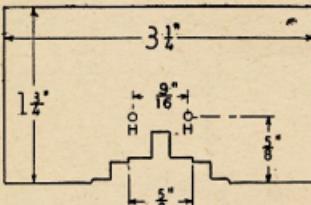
Shield for p.p. 6J6 stage, showing cutout to allow fitting over the socket and its associated fixing bolts.
